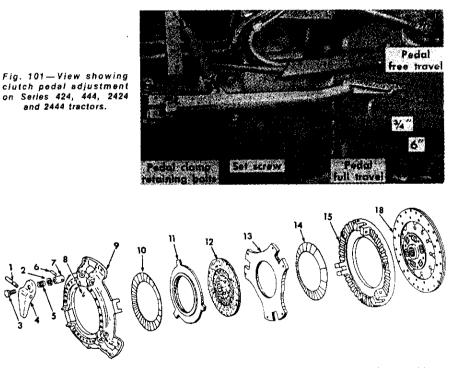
Exploded view of Series 424, 444, 2424 and 2444 dual plate clutch assembly.
